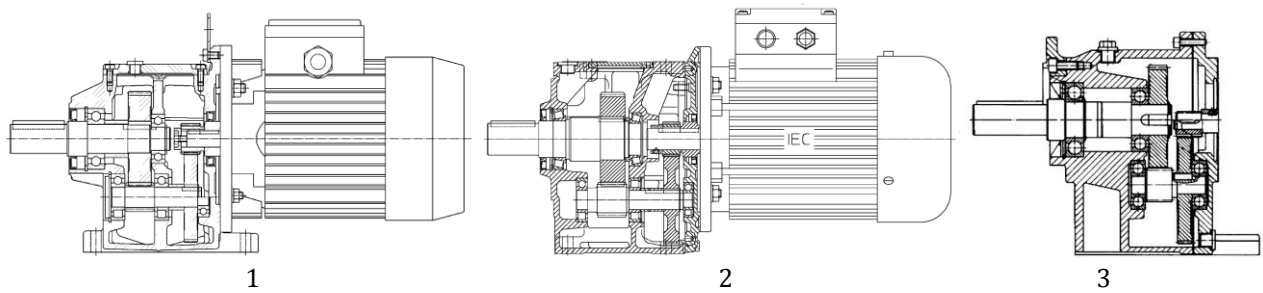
Characteristic solutions of universal gear reducer with (1) monoblock housing (Rossi), (2) with two-part housing intended for radial mounting (Rossi) and (3) with two-part housing intended for axial mounting (Rehfuß) [5]. Note: Monoblock housing is every housing that has all shaft supports inside the housing as one element. If any shaft support is located on the front or back cover, than it is considered as two-part housing.
